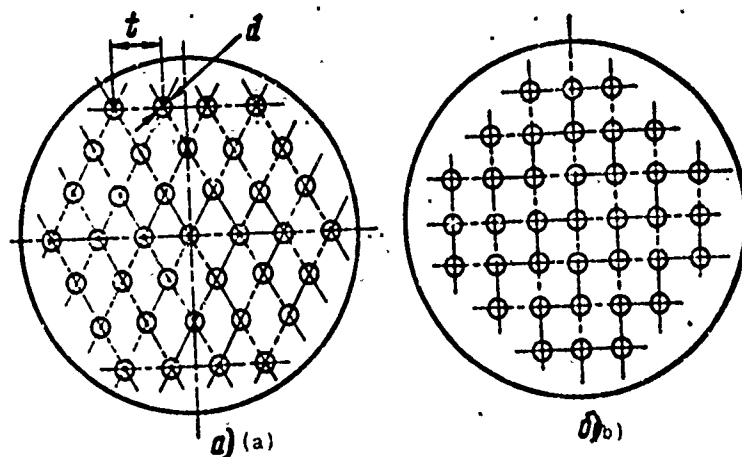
Arrangement of openings in pipe grid (panel):
